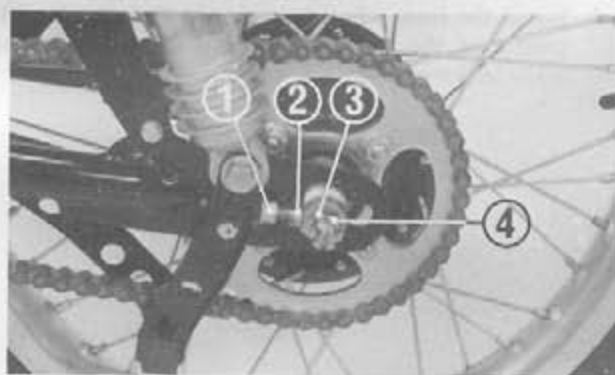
(1) Lock nut (2) Adjusting bolt (3) Rear axle nut (4) Cotter pin
